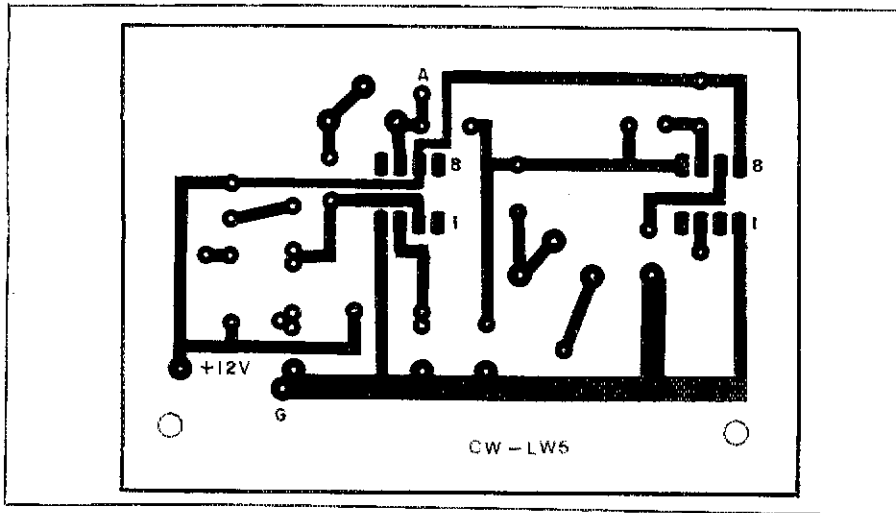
Etching pattern for the voltage-to-frequency converter. The pattern is shown at actual size from the foil side of the board with black representing copper.
